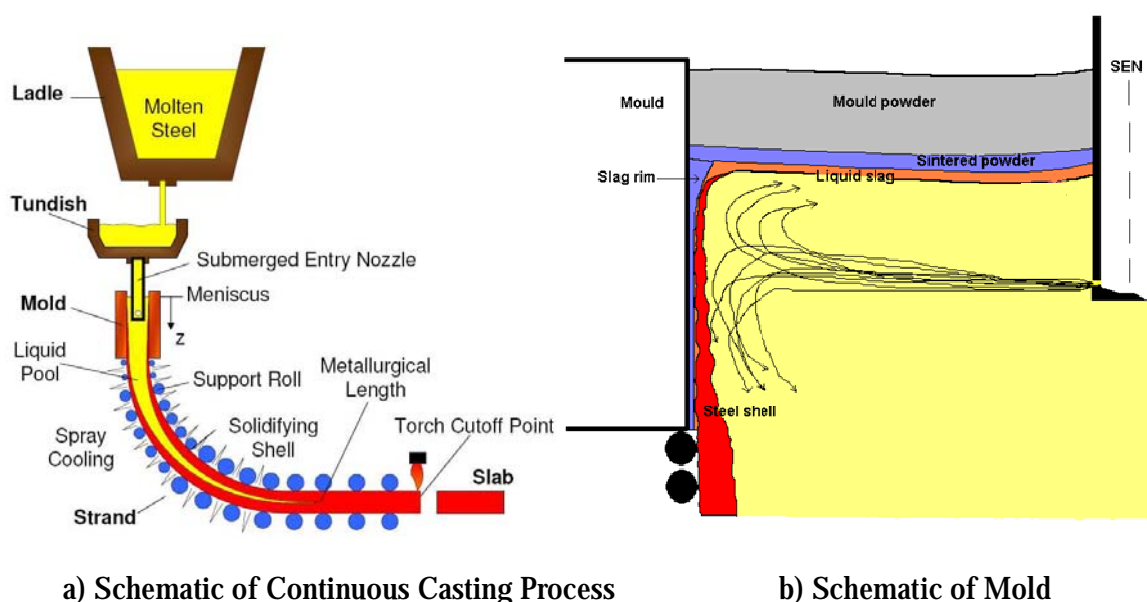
Schematic diagrams of Continuous Casting Process and Mold in the steelmaking process
